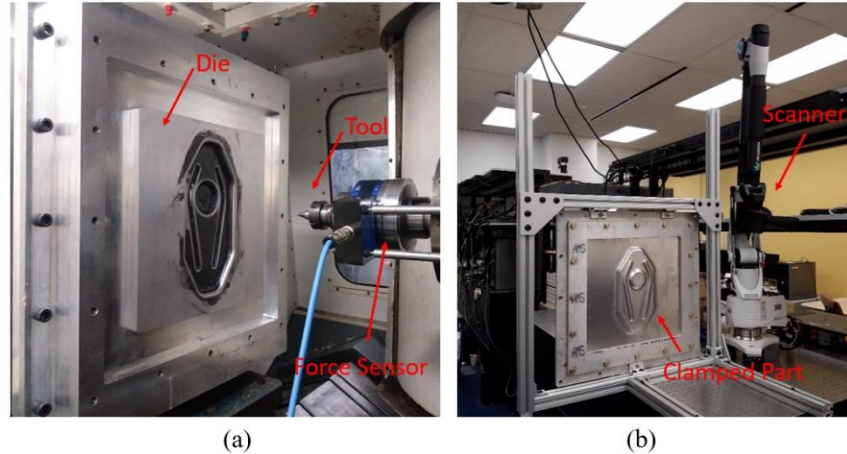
Experimental Setup of TPIF including a die, tool with a mounted force sensor (a), and laser scanner setup with clamped part (b)
